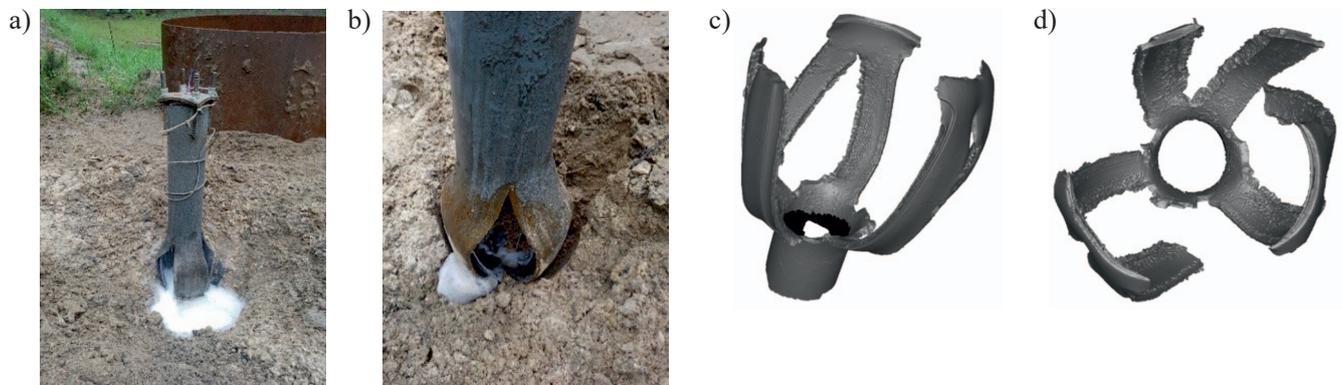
A view of shooting model following the test completion; a) front view, b) side view, c) d) the views of 3D scans of tested tool body pipes, removed from inside of the shooting model
